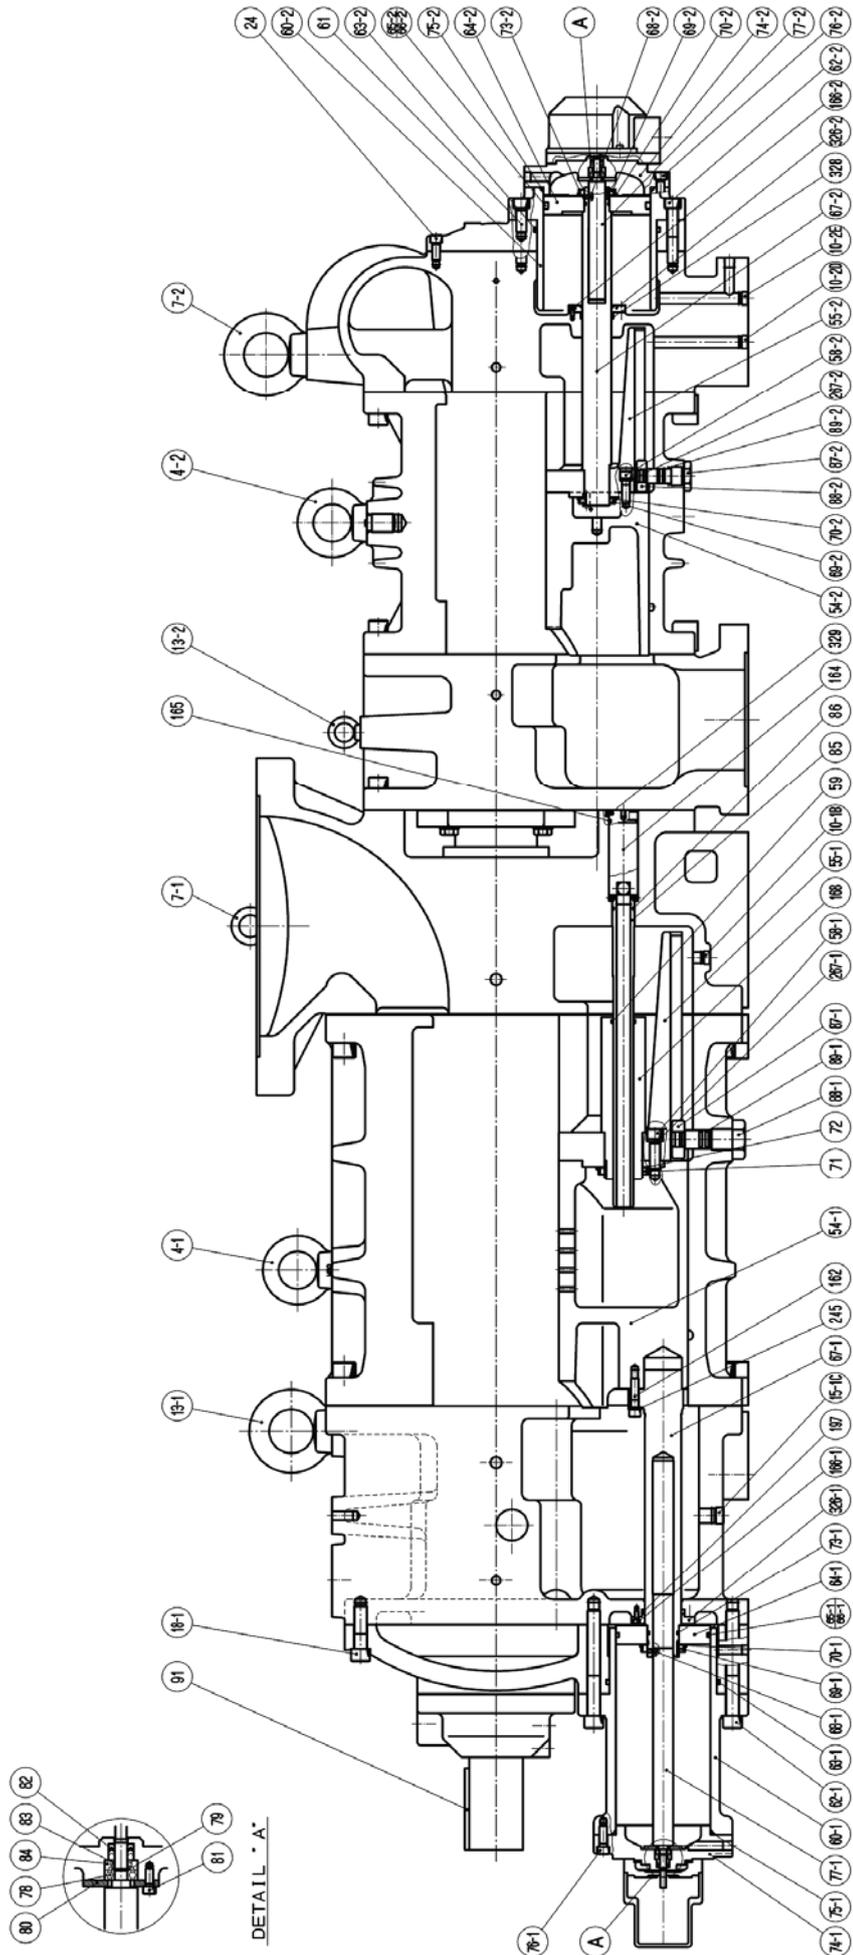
3225LLLC Assembly Sectional View (Vertical)
